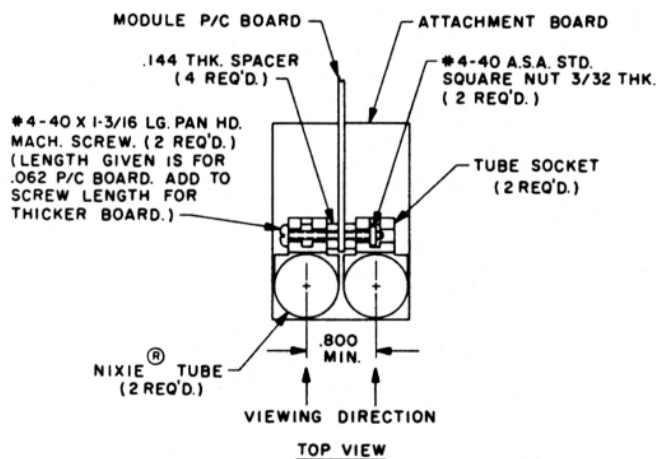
DRIVER MODULE BOARD DUAL SOCKET MOUNTING
